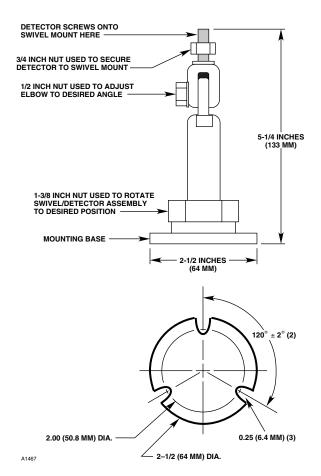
Dimensions of Mounting Bracket in Inches (Millimeters)
